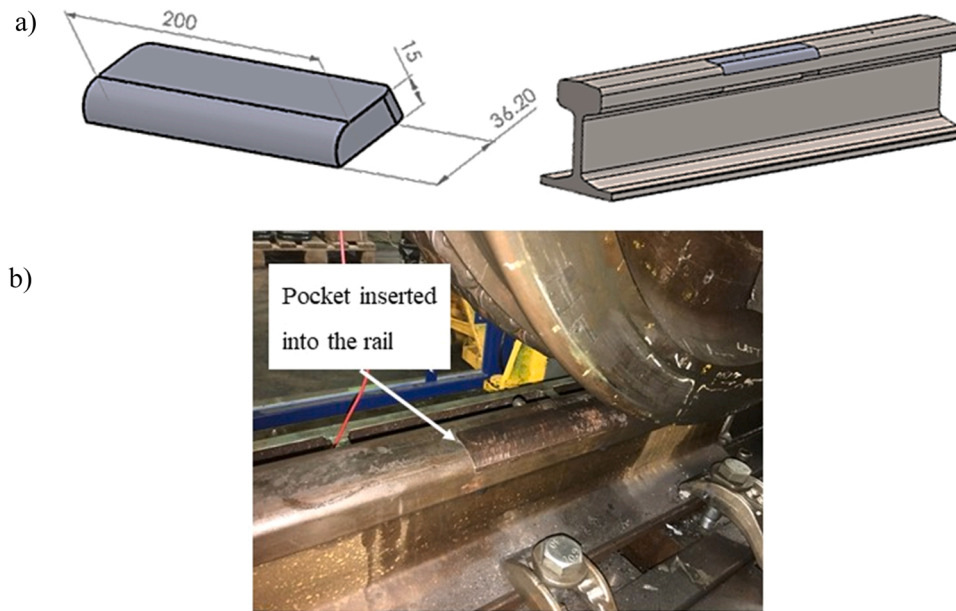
a) Dimensions of the specimens and samples (in mm); b) Representation of the specimen inserted into the pocket.
